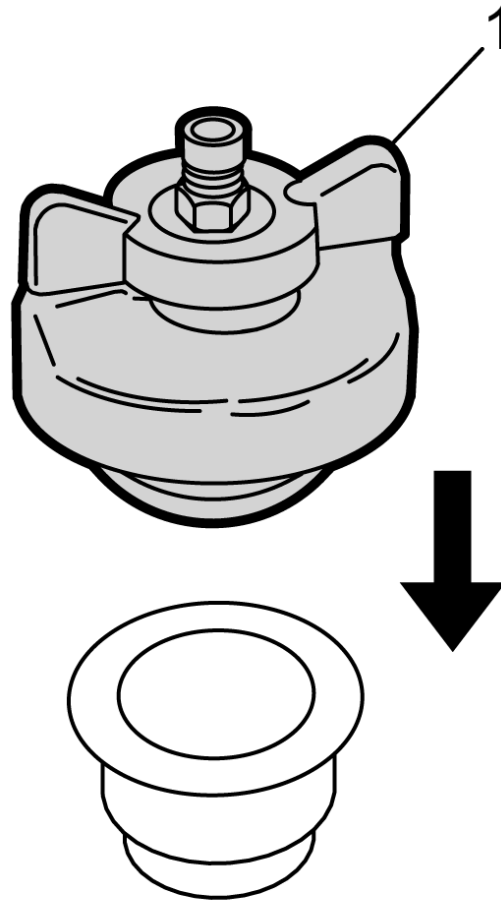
Radiator Cap & Surge Tank Test Adapter
